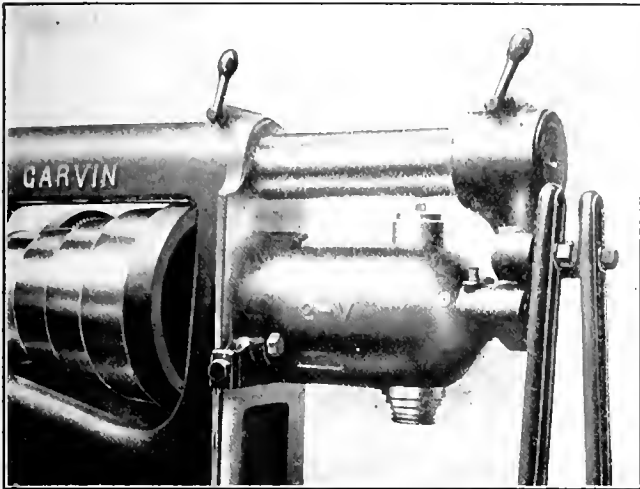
Rugged Attachment for Vertical Milling Exclusively
